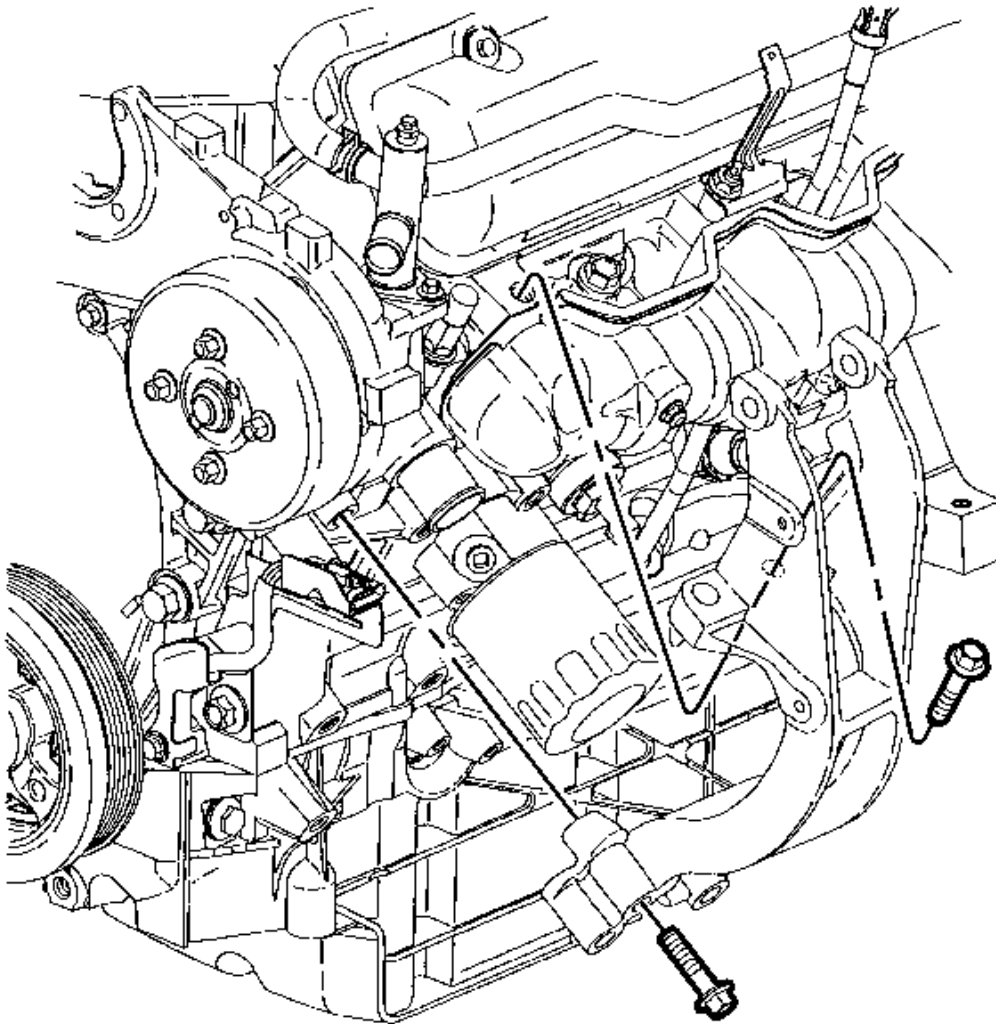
View Of Engine Mount Strut & Air Conditioning Compressor Bracket
